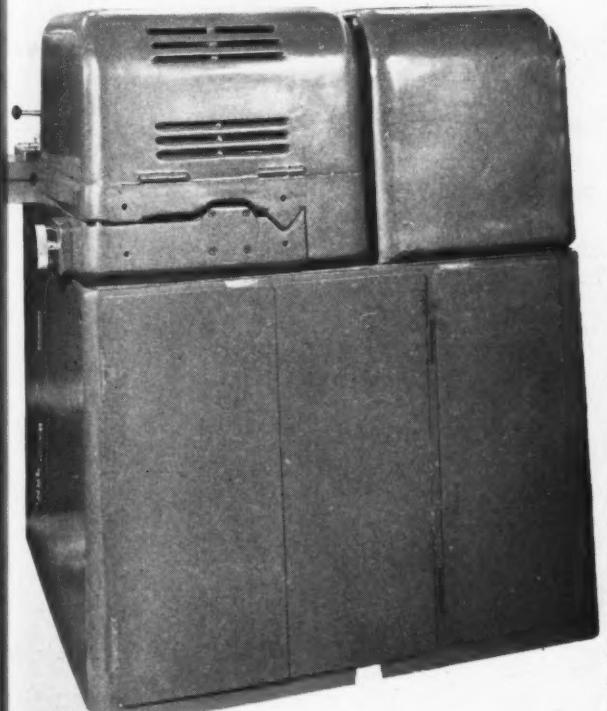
Root 2 rectangle is utilized for shape of machine and component parts. Shape is repeated in the knee hole, headstock, wheelbase and bed of machine
